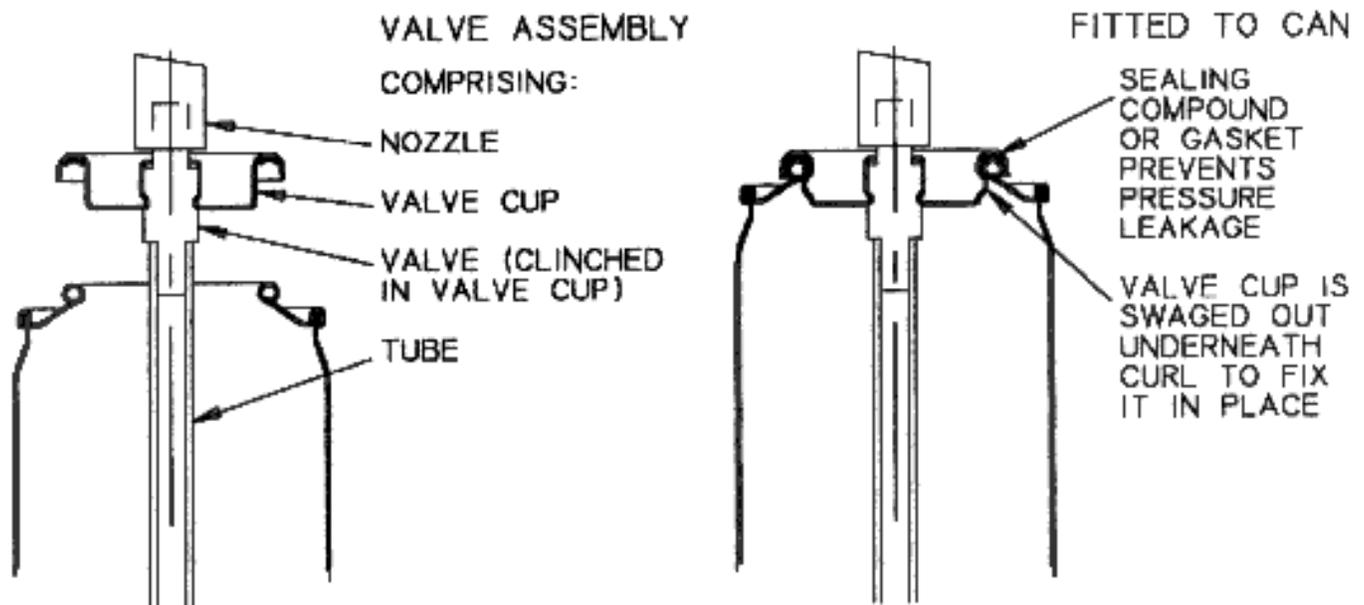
FITTING OF AEROSOL VALVE ASSEMBLY
